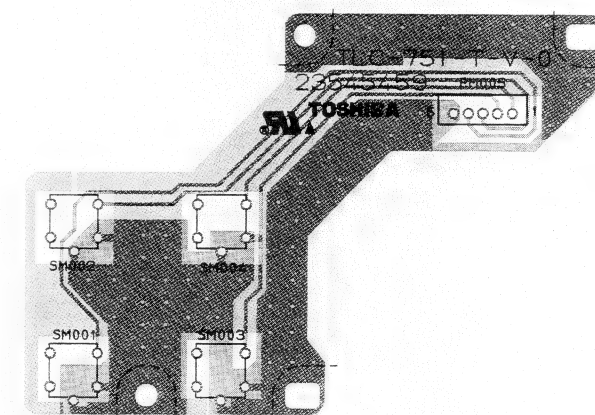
U0042 Switch PC Board (Bottom Side)
